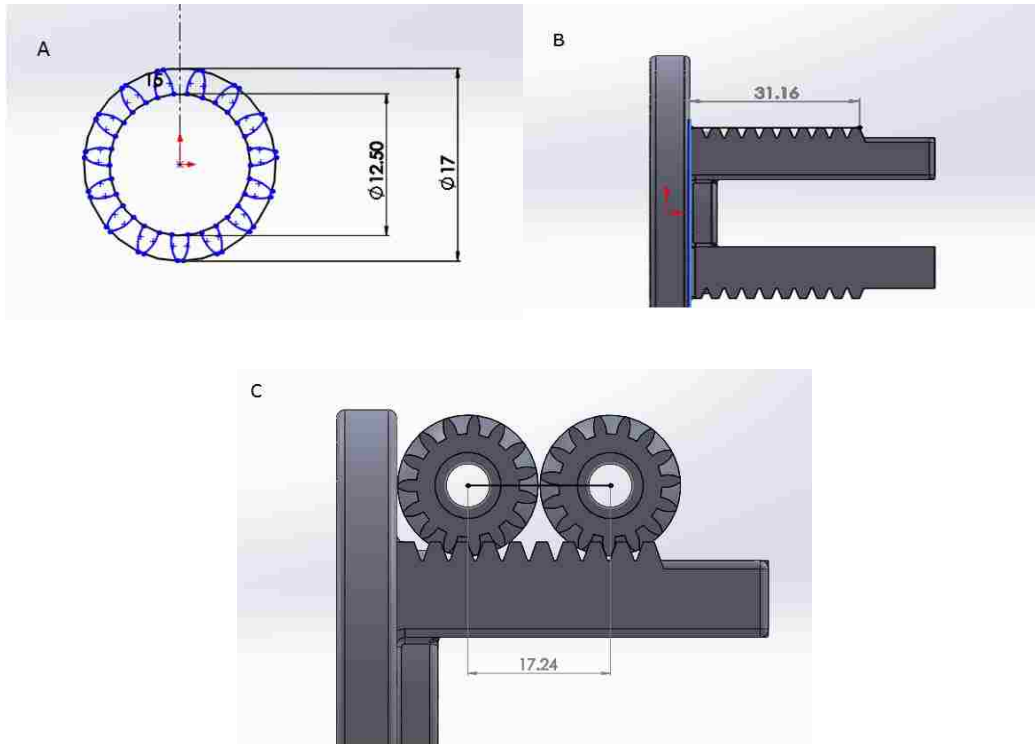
Several specific dimensions of the gear and gear rack: A. Diameter of the gear; B. Length of the gear rack; C. Moving range of the gear and gear rack
